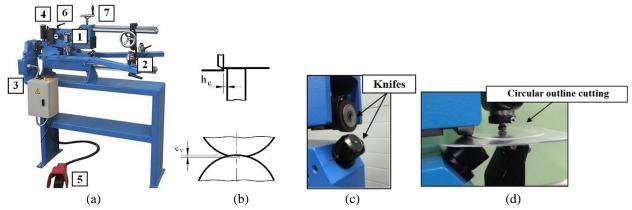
Experimental equipment and main parameters: (a) shear-slitting device: 1 – cutting tools, 2 – sheet holder, 3 - engine, 4 - clearance knob with scale, 5 - drive pedal, 6 - cutting speed knob with scale, 7 - knife overlap regulator (b) main slitting parameters, (c) zoom of cutting tools and (d) example process of circular outline cutting
